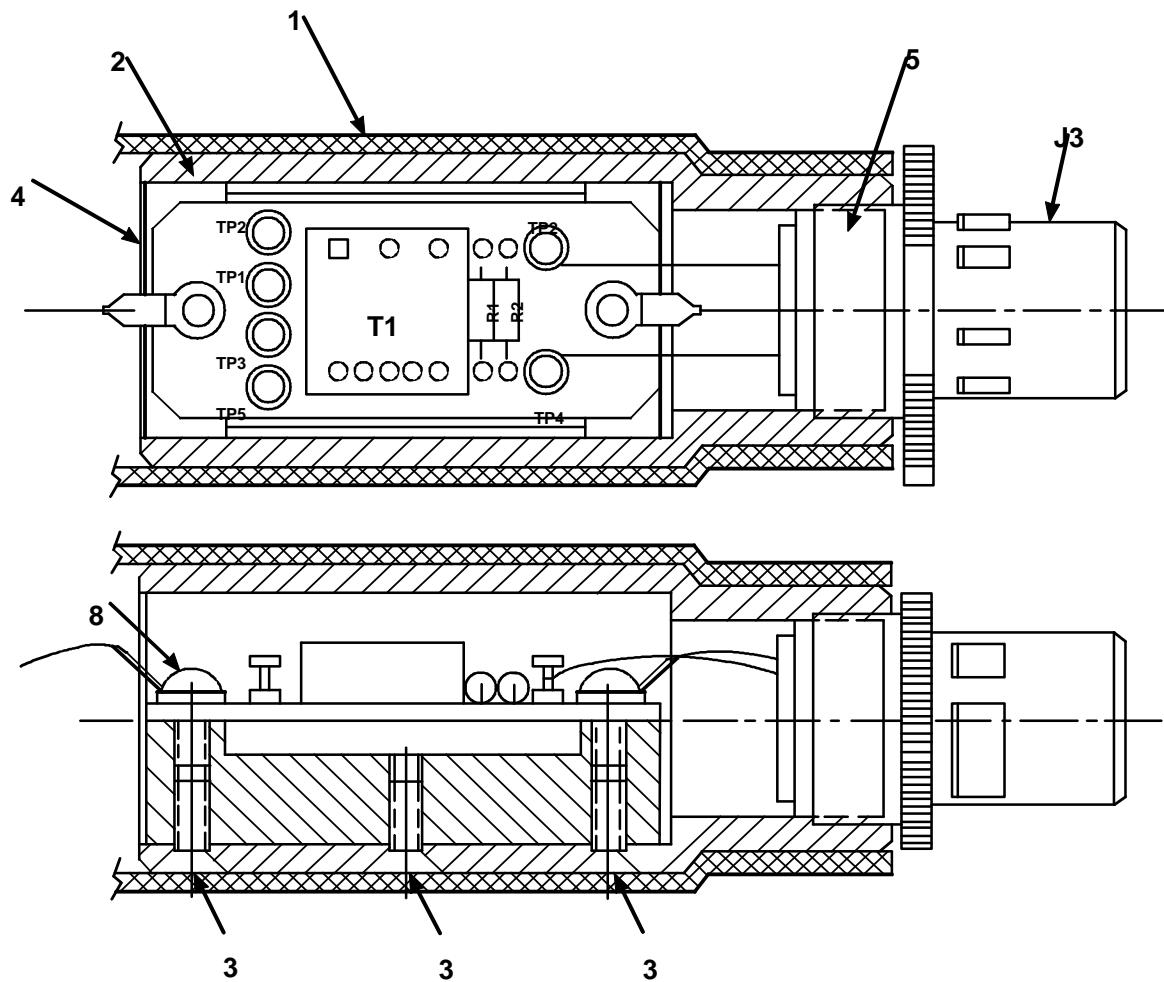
1553 Stub (Part of Power and Data Cable (5-M), P/N 12979005)
